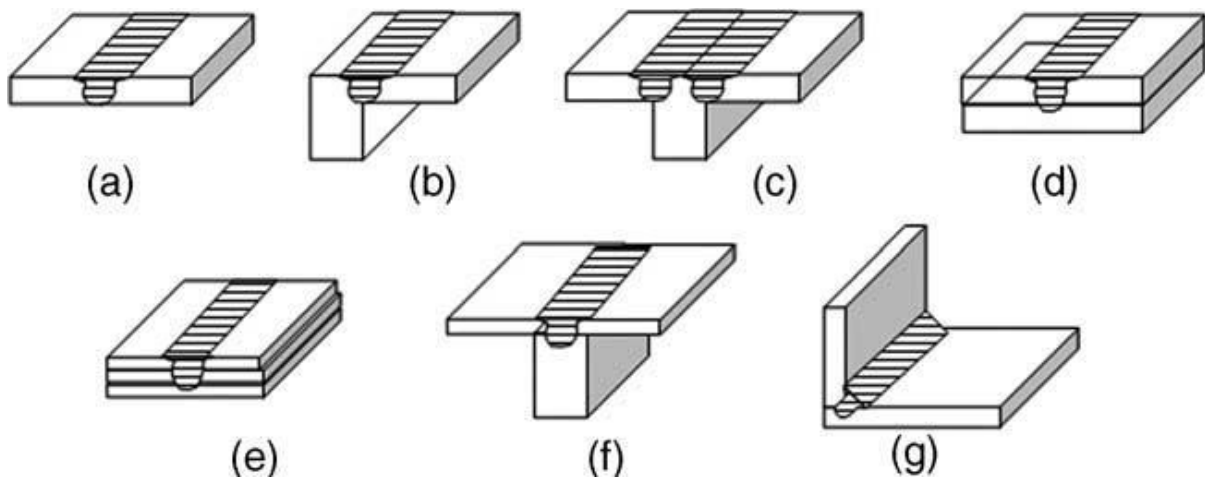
kinds of joints Square butt, edge butt, T butt joint, lap joint, multiple lap joint, T lap joint, fillet joint, and (a) lap joint [2]
